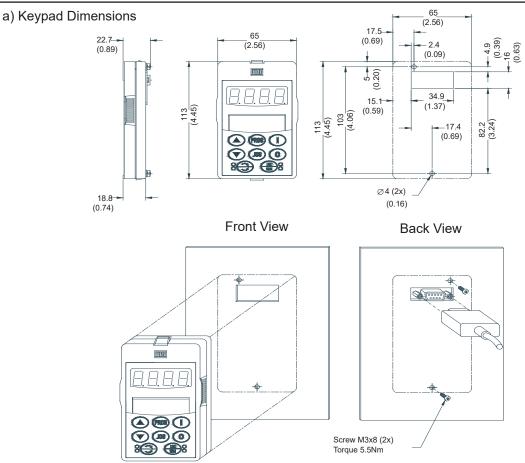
Dimensions in mm (in) and how to install the Keypad directly in the panel without the frame
